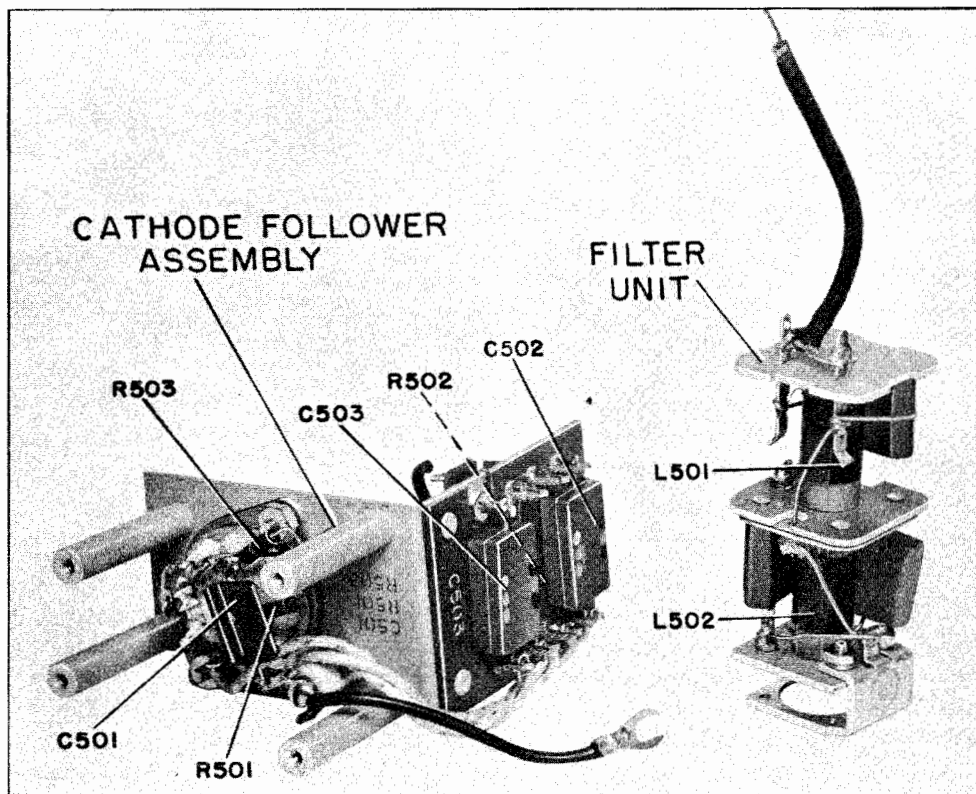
Receiver Coupling Kit Type 10563, Bottom View
